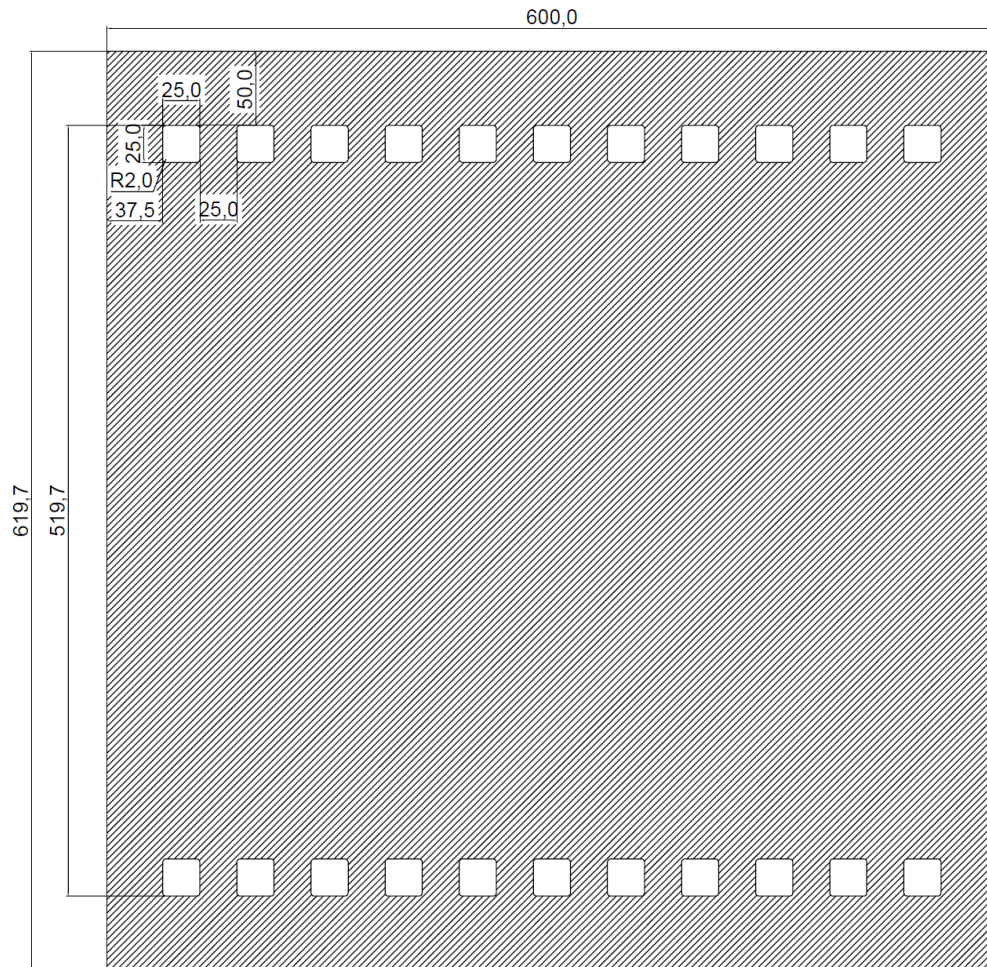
Dimensions of the side of the mechanical support in millimeter
